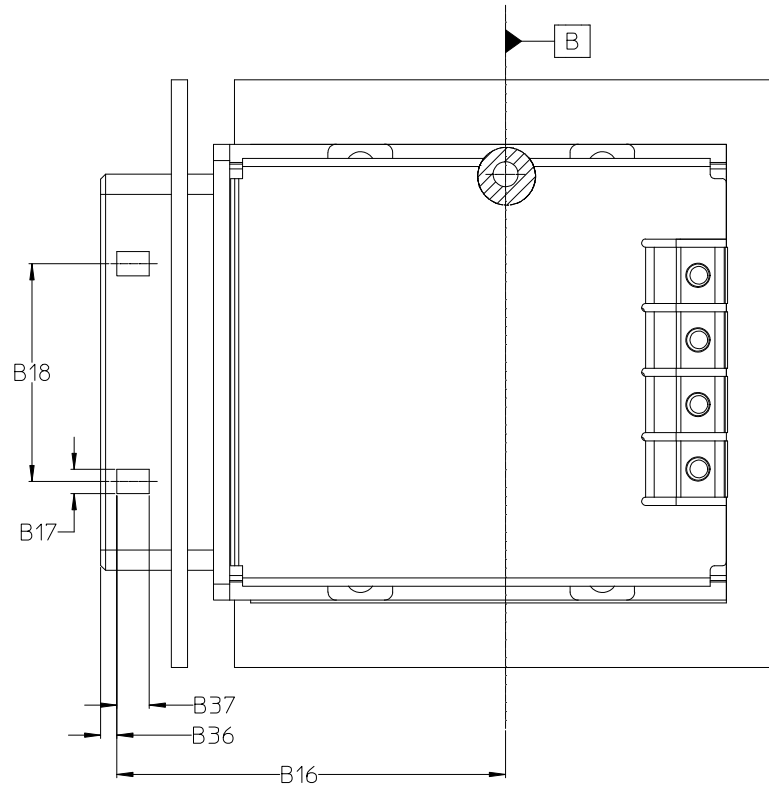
x4 EMI Guide Housing Assembly Top View
